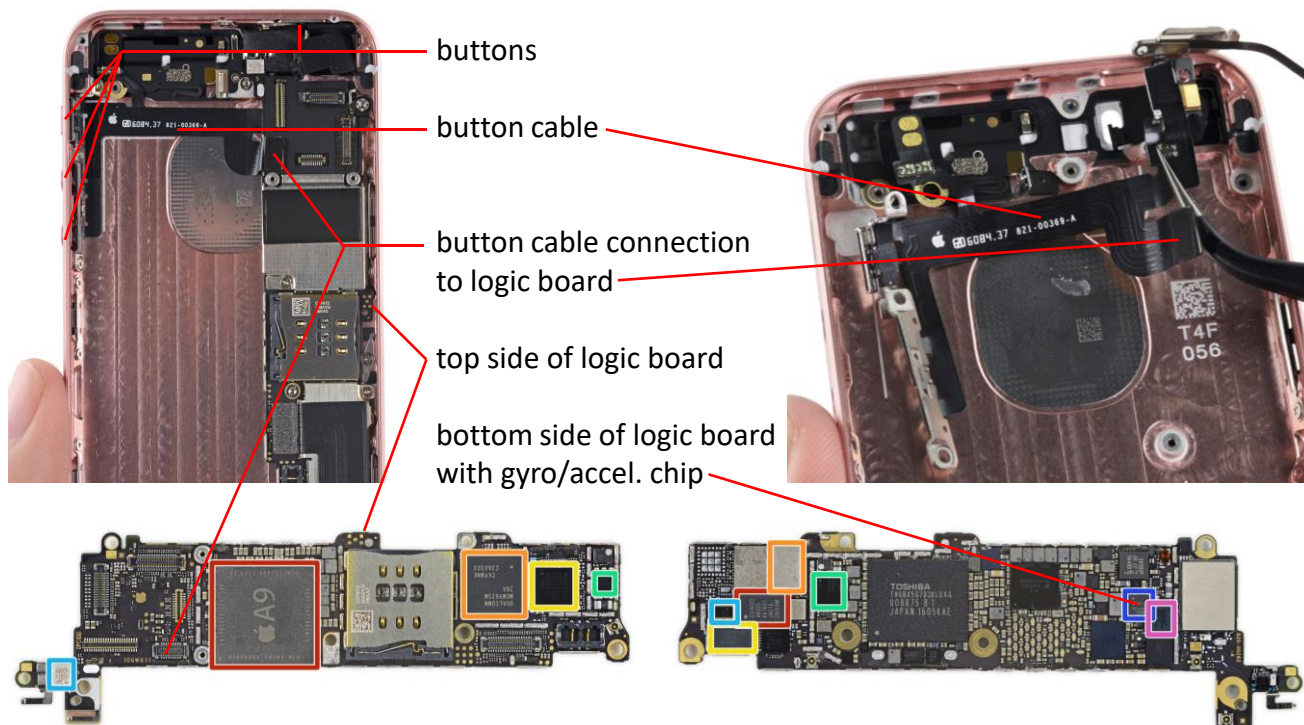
Four teardown views of iPhone SE showing mounting of sensors to opposite sides of circuit board, with labeling added, see Exs. 65–68.
